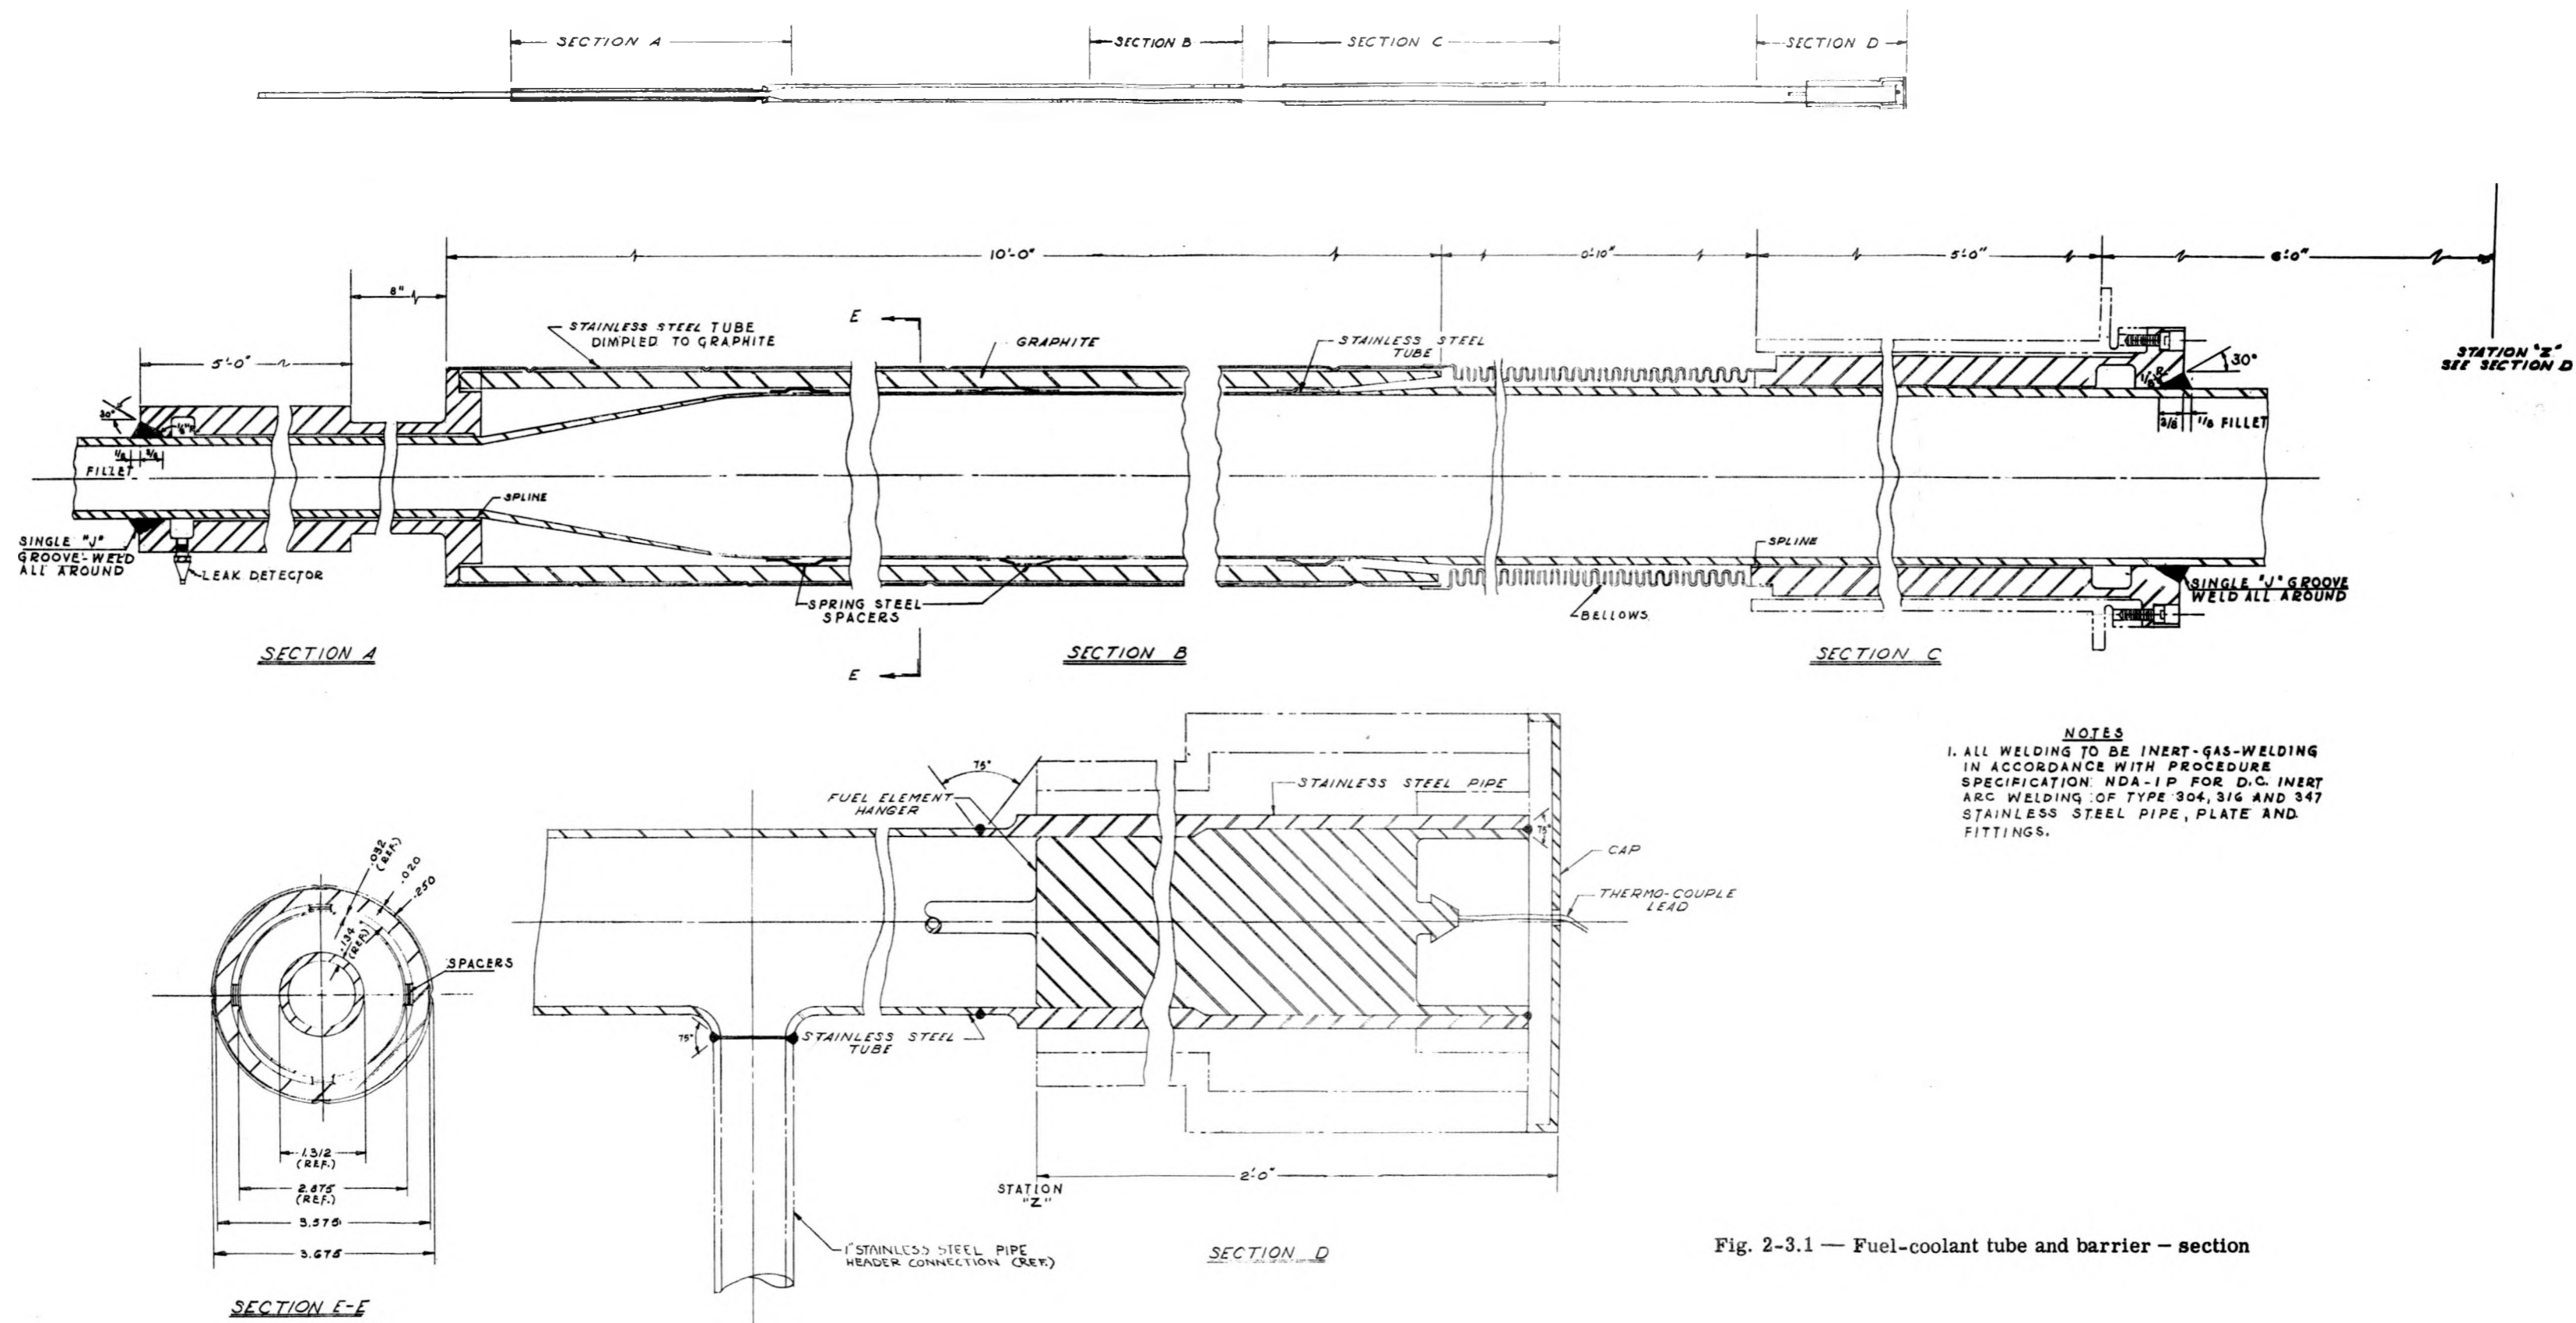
Fuel-coolant tube and barrier — section
